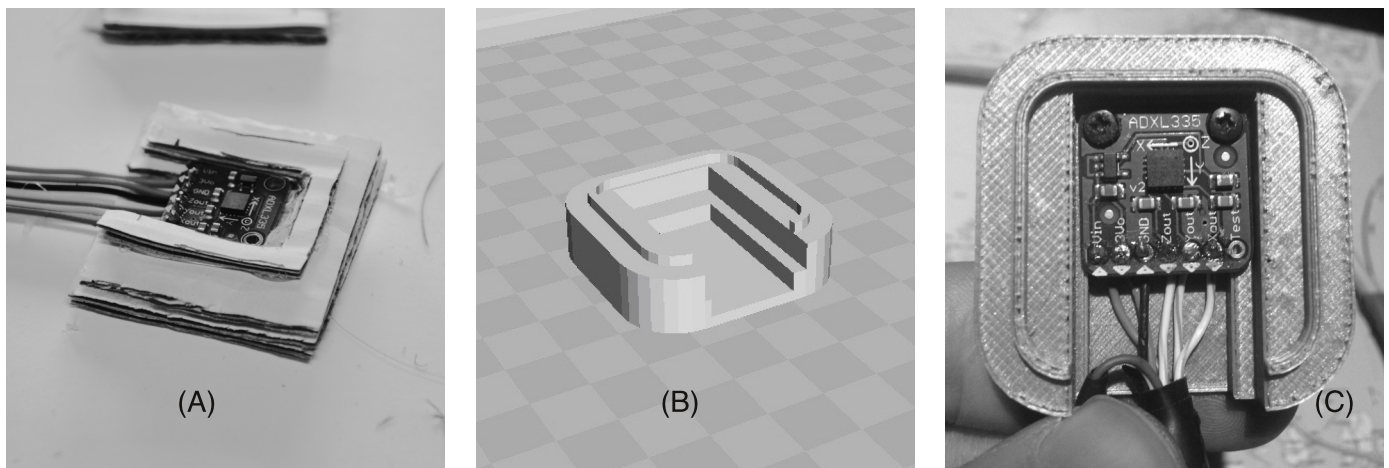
Prototype-driven process: (A) cardboard model (B) 3D model (C) additive manufactured prototype
